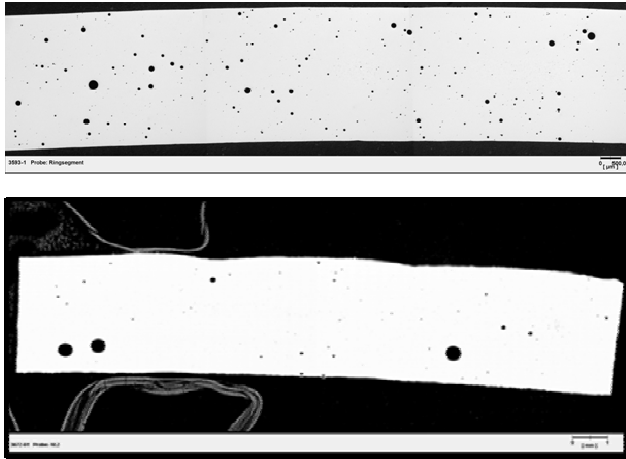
Longitudinal sections, as polished, through laser welds with C 263 filler material on sprayformed material (top) and CC-material (bottom). Sheet thickness is 3 mm.
